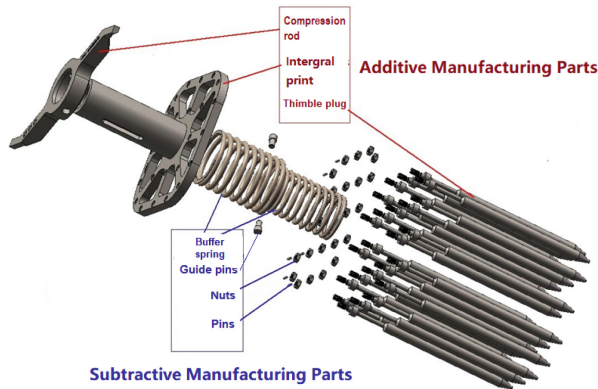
Illustration of preliminary AM alternatives for thimble plug assembly
